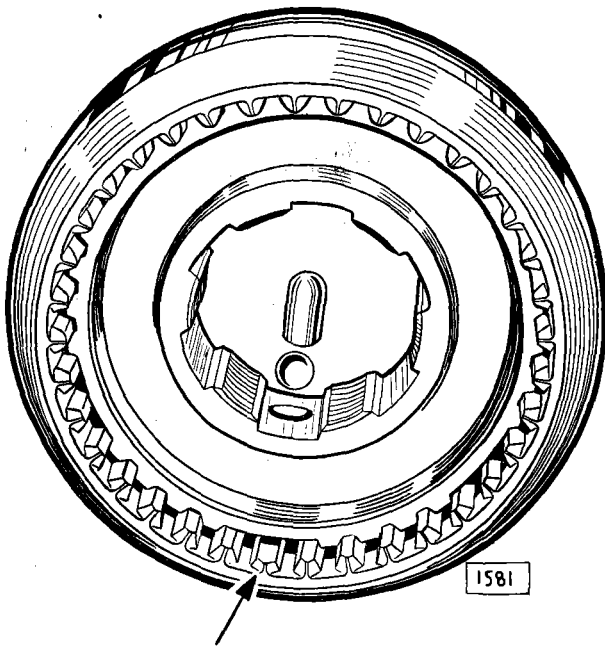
The relieved teeth in the operating sleeve must be in line with the interlock plunger holes in the synchro sleeve.
